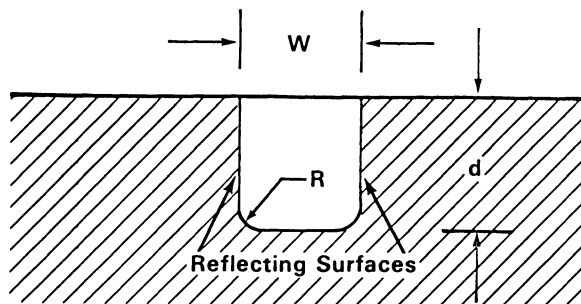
Ultrasonic Test Standard Notch Cross Section
